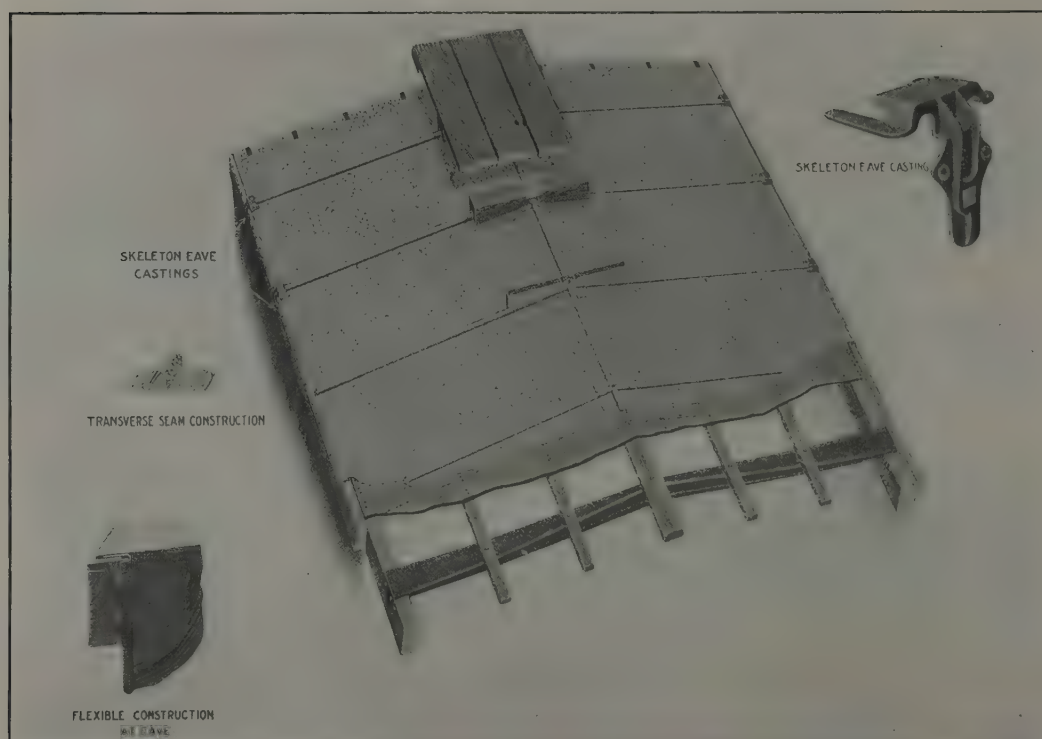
Chicago Flexible Outside Metal Roof No. 20-A-1. Chicago-Cleveland Car Roofing Company.
